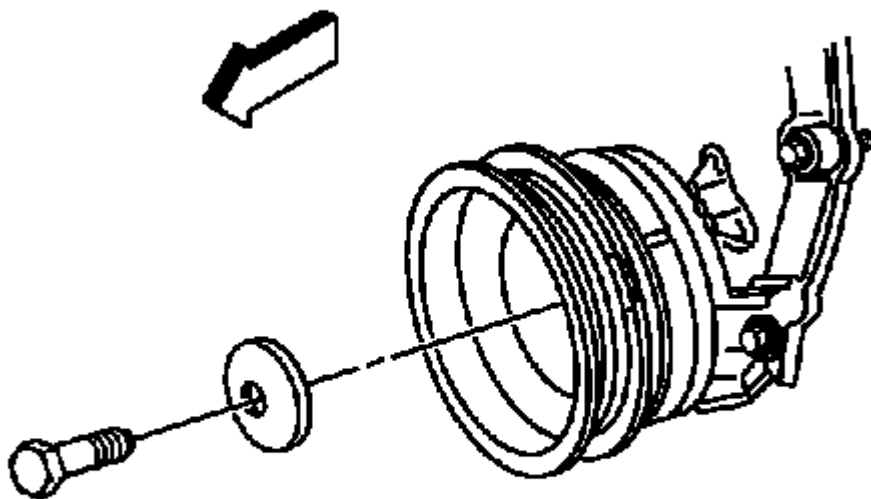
View Of Crankshaft Balancer Washer & Bolt
